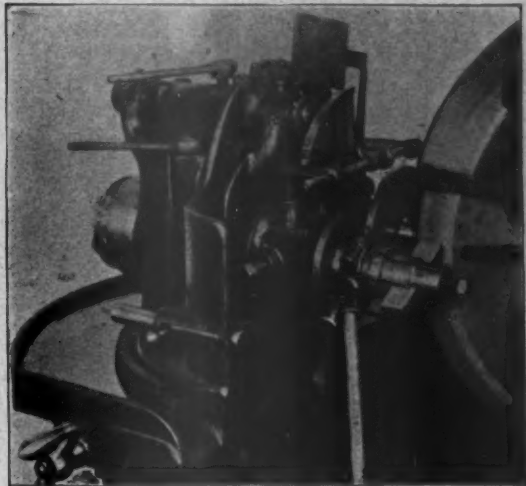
ATTACHMENT FOR GRINDING BORING CUTTERS WITH CORRECT AND UNIFORM CLEARANCE.
